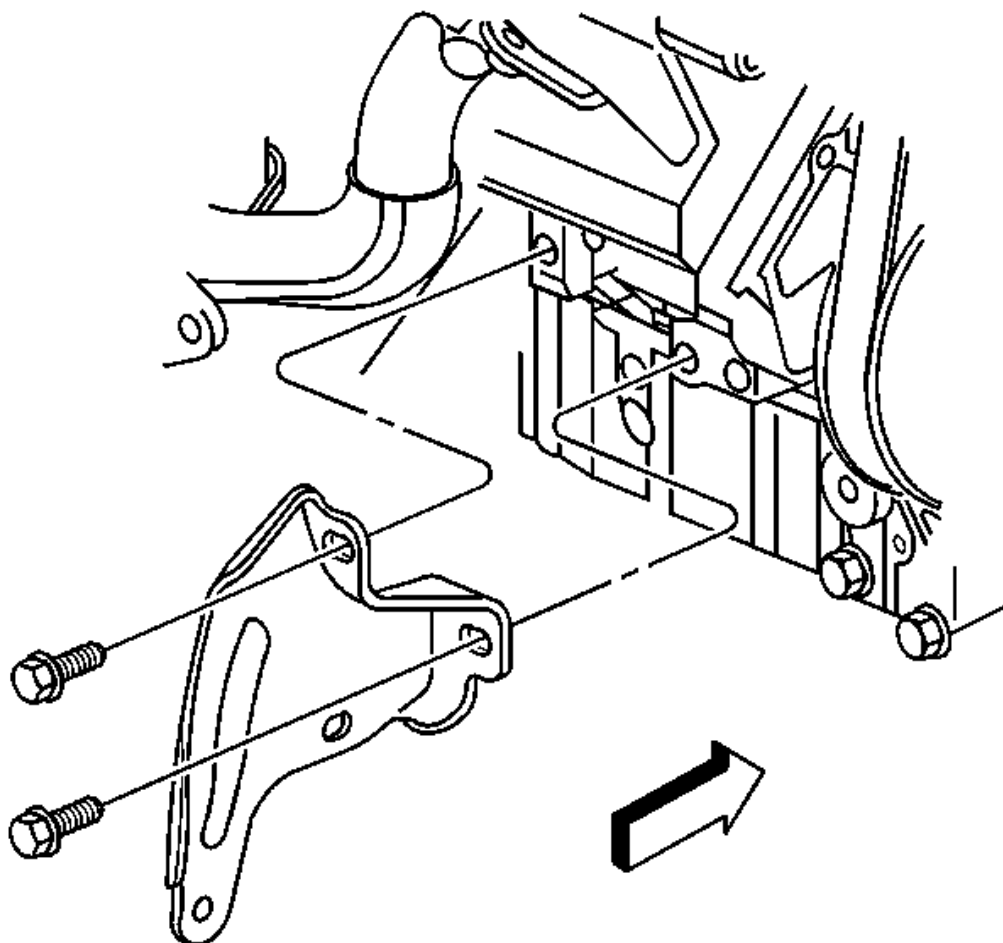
Locating Strut Bracket-To-Engine Bolts
